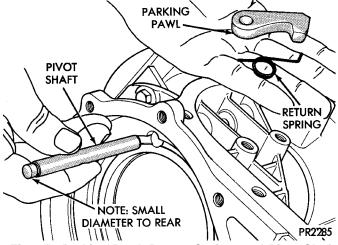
Parking Pawl, Return Spring, and Pivot Shaft
